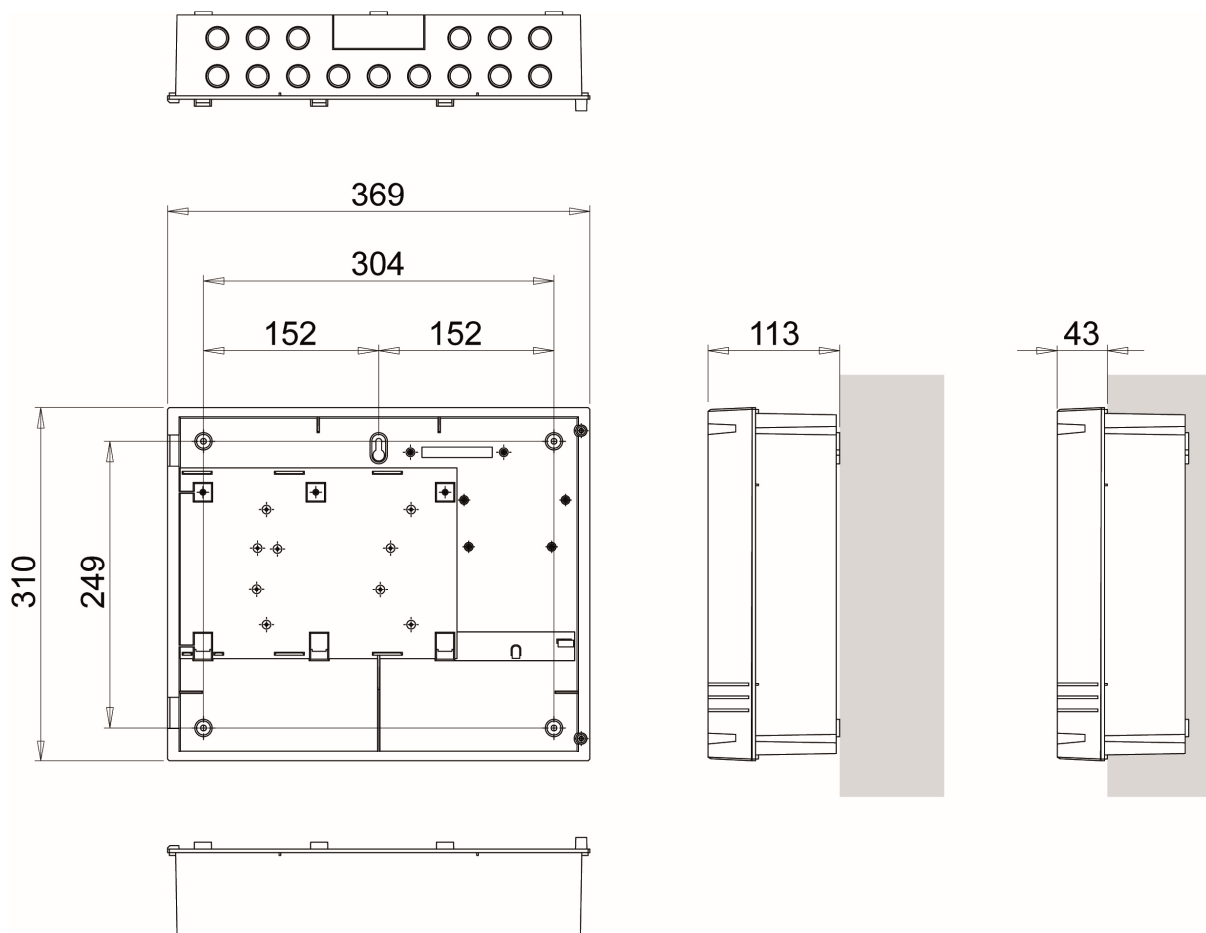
Plan View inside enclosure without the PCB and side view for surface installation
